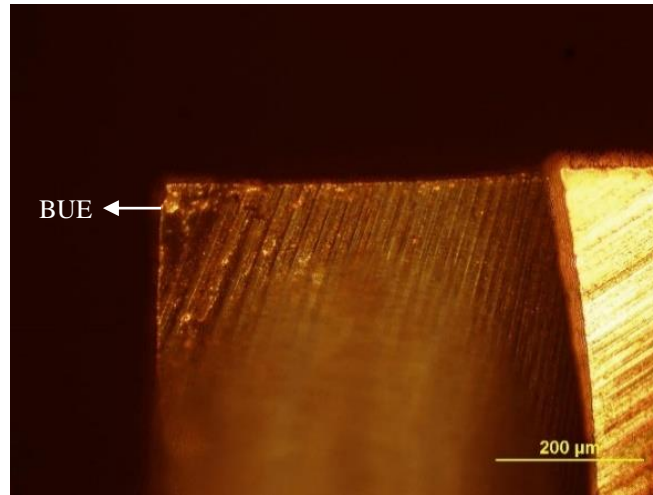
Built-up-edge formation observed on rake surfaces of uncoated WC tool. Machining 4 consecutive slots, 32 mm length, 15 m/min and 80 m/min speed, 15 $\mu\text{m}/\text{tooth}$ chip load, dry and MQL, 50 μm and 100 μm depth, A36 carbon steel.
